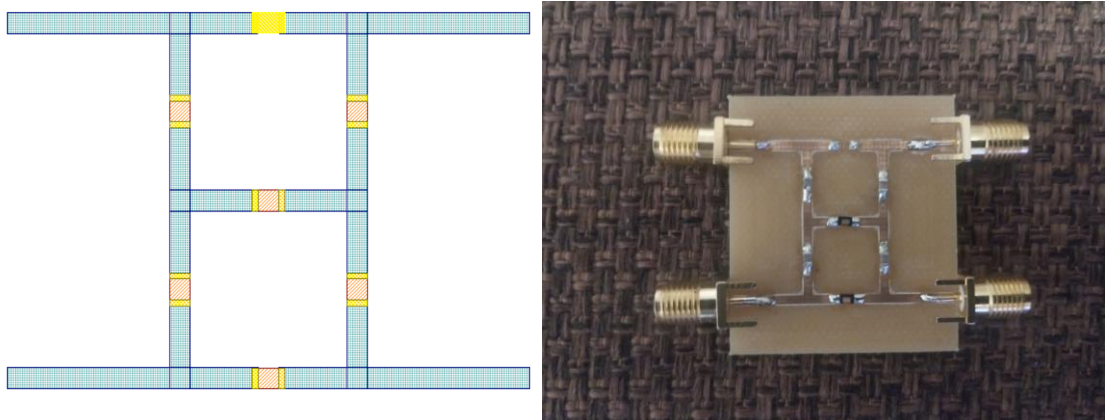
The Layout and Fabricated Lumped Element Hybrid Coupler.
